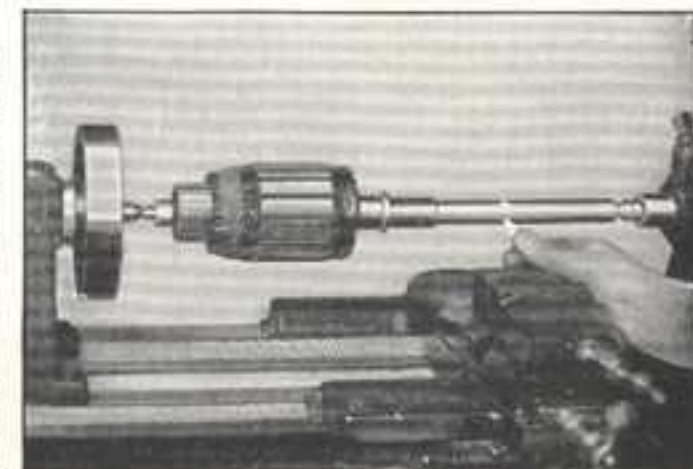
Testing a Bent Armature Shaft in the Lathe
